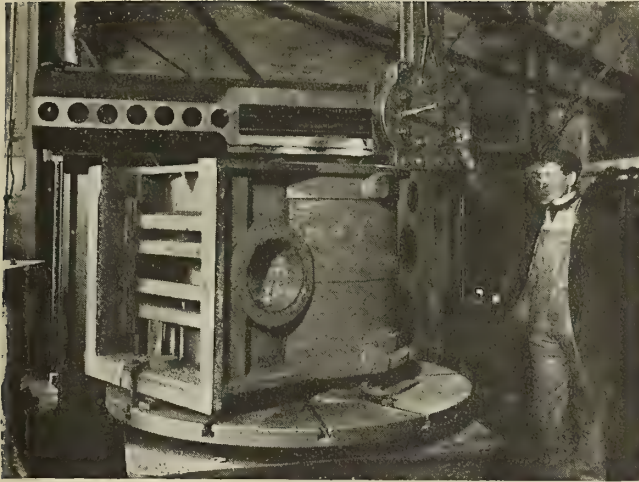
Machining an Engine Cylinder in the Machine Shop
